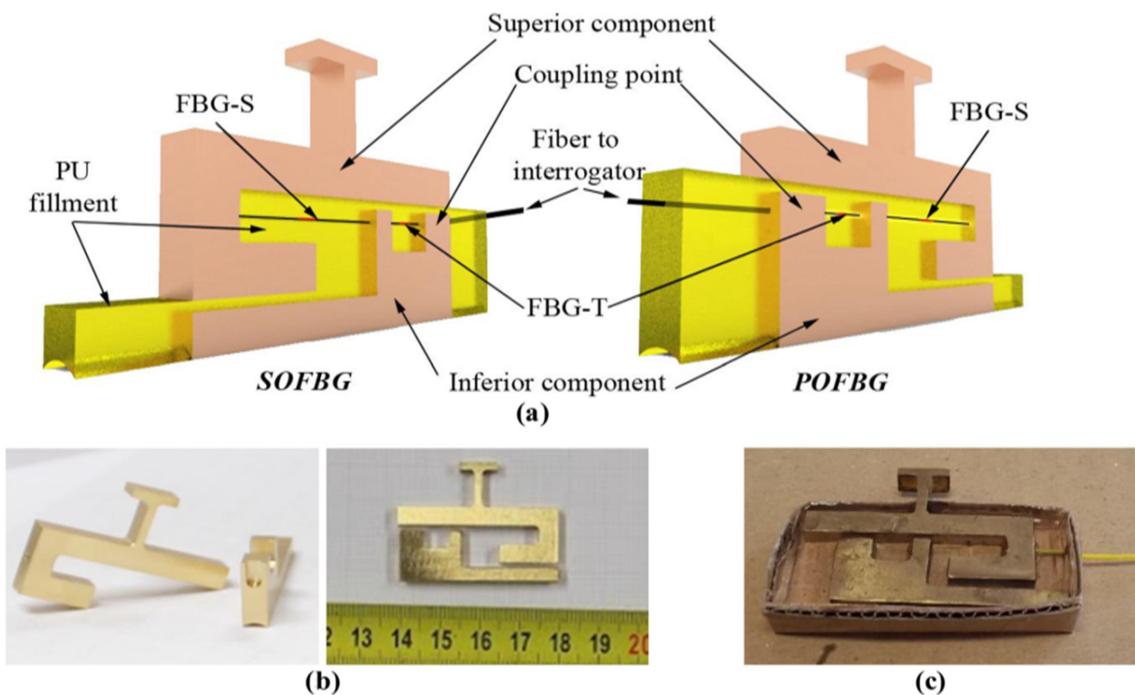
(a) Details of the bond-slip OFS; (b) image of the two parts (ruler for scale in cm) and (c) sensor after PU resin filling, inside a paper mould, without surfaces regularization.
